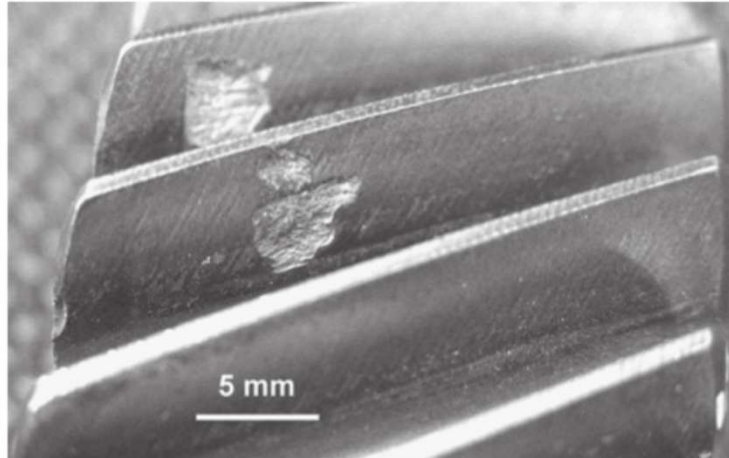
Pitting due to rolling contact fatigue of helical gear tooth (Olver 2005).
